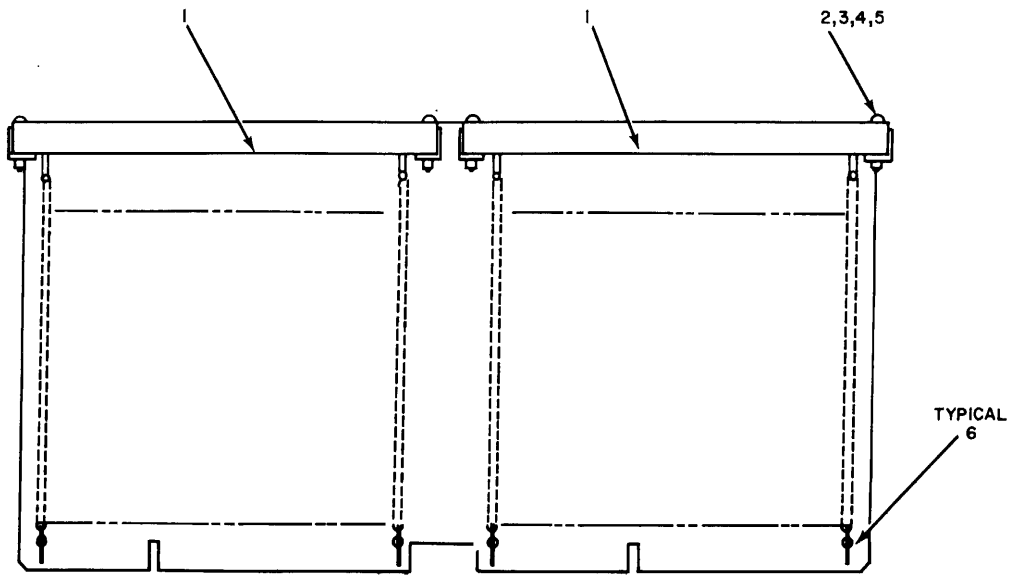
Special Tool Extender Card Assembly SMD-532026.
